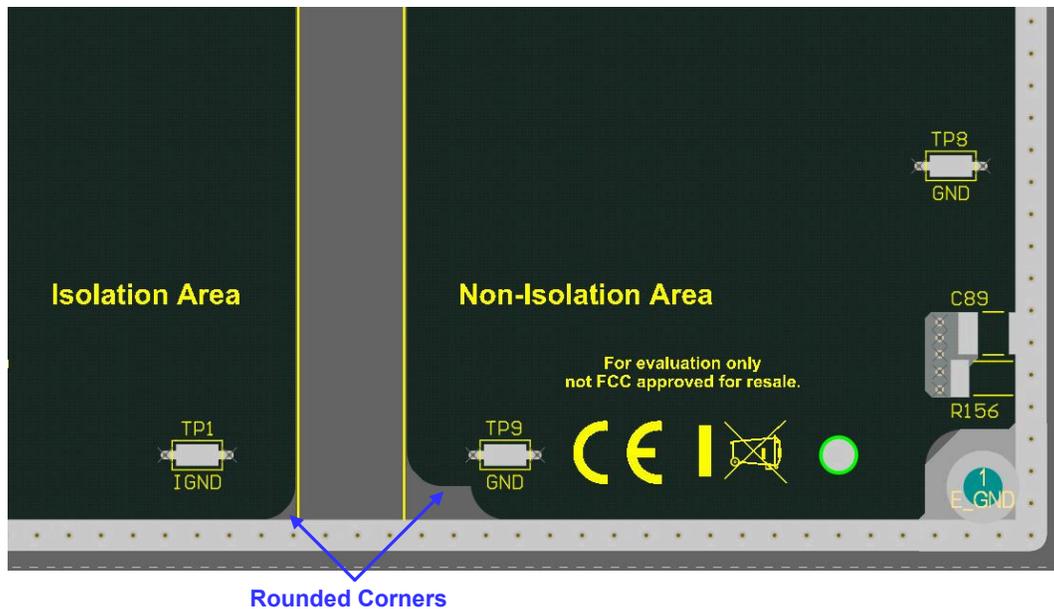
PCB Layout Design – Plane Edge on Inner Negative Layer
